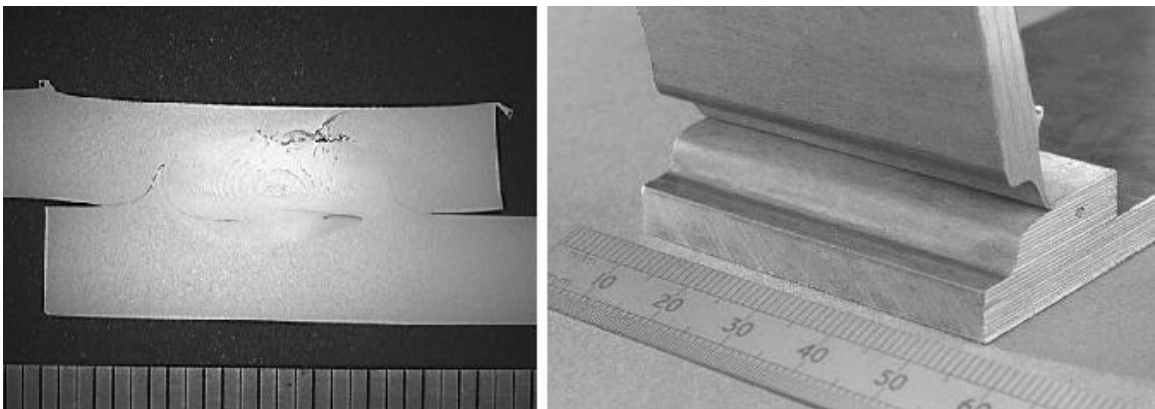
Macrograph Revealing Defects (left) and Bend Test Failure (right) from 5083-O Lap Weld in 6 mm Thickness; Image adapted from [35]
